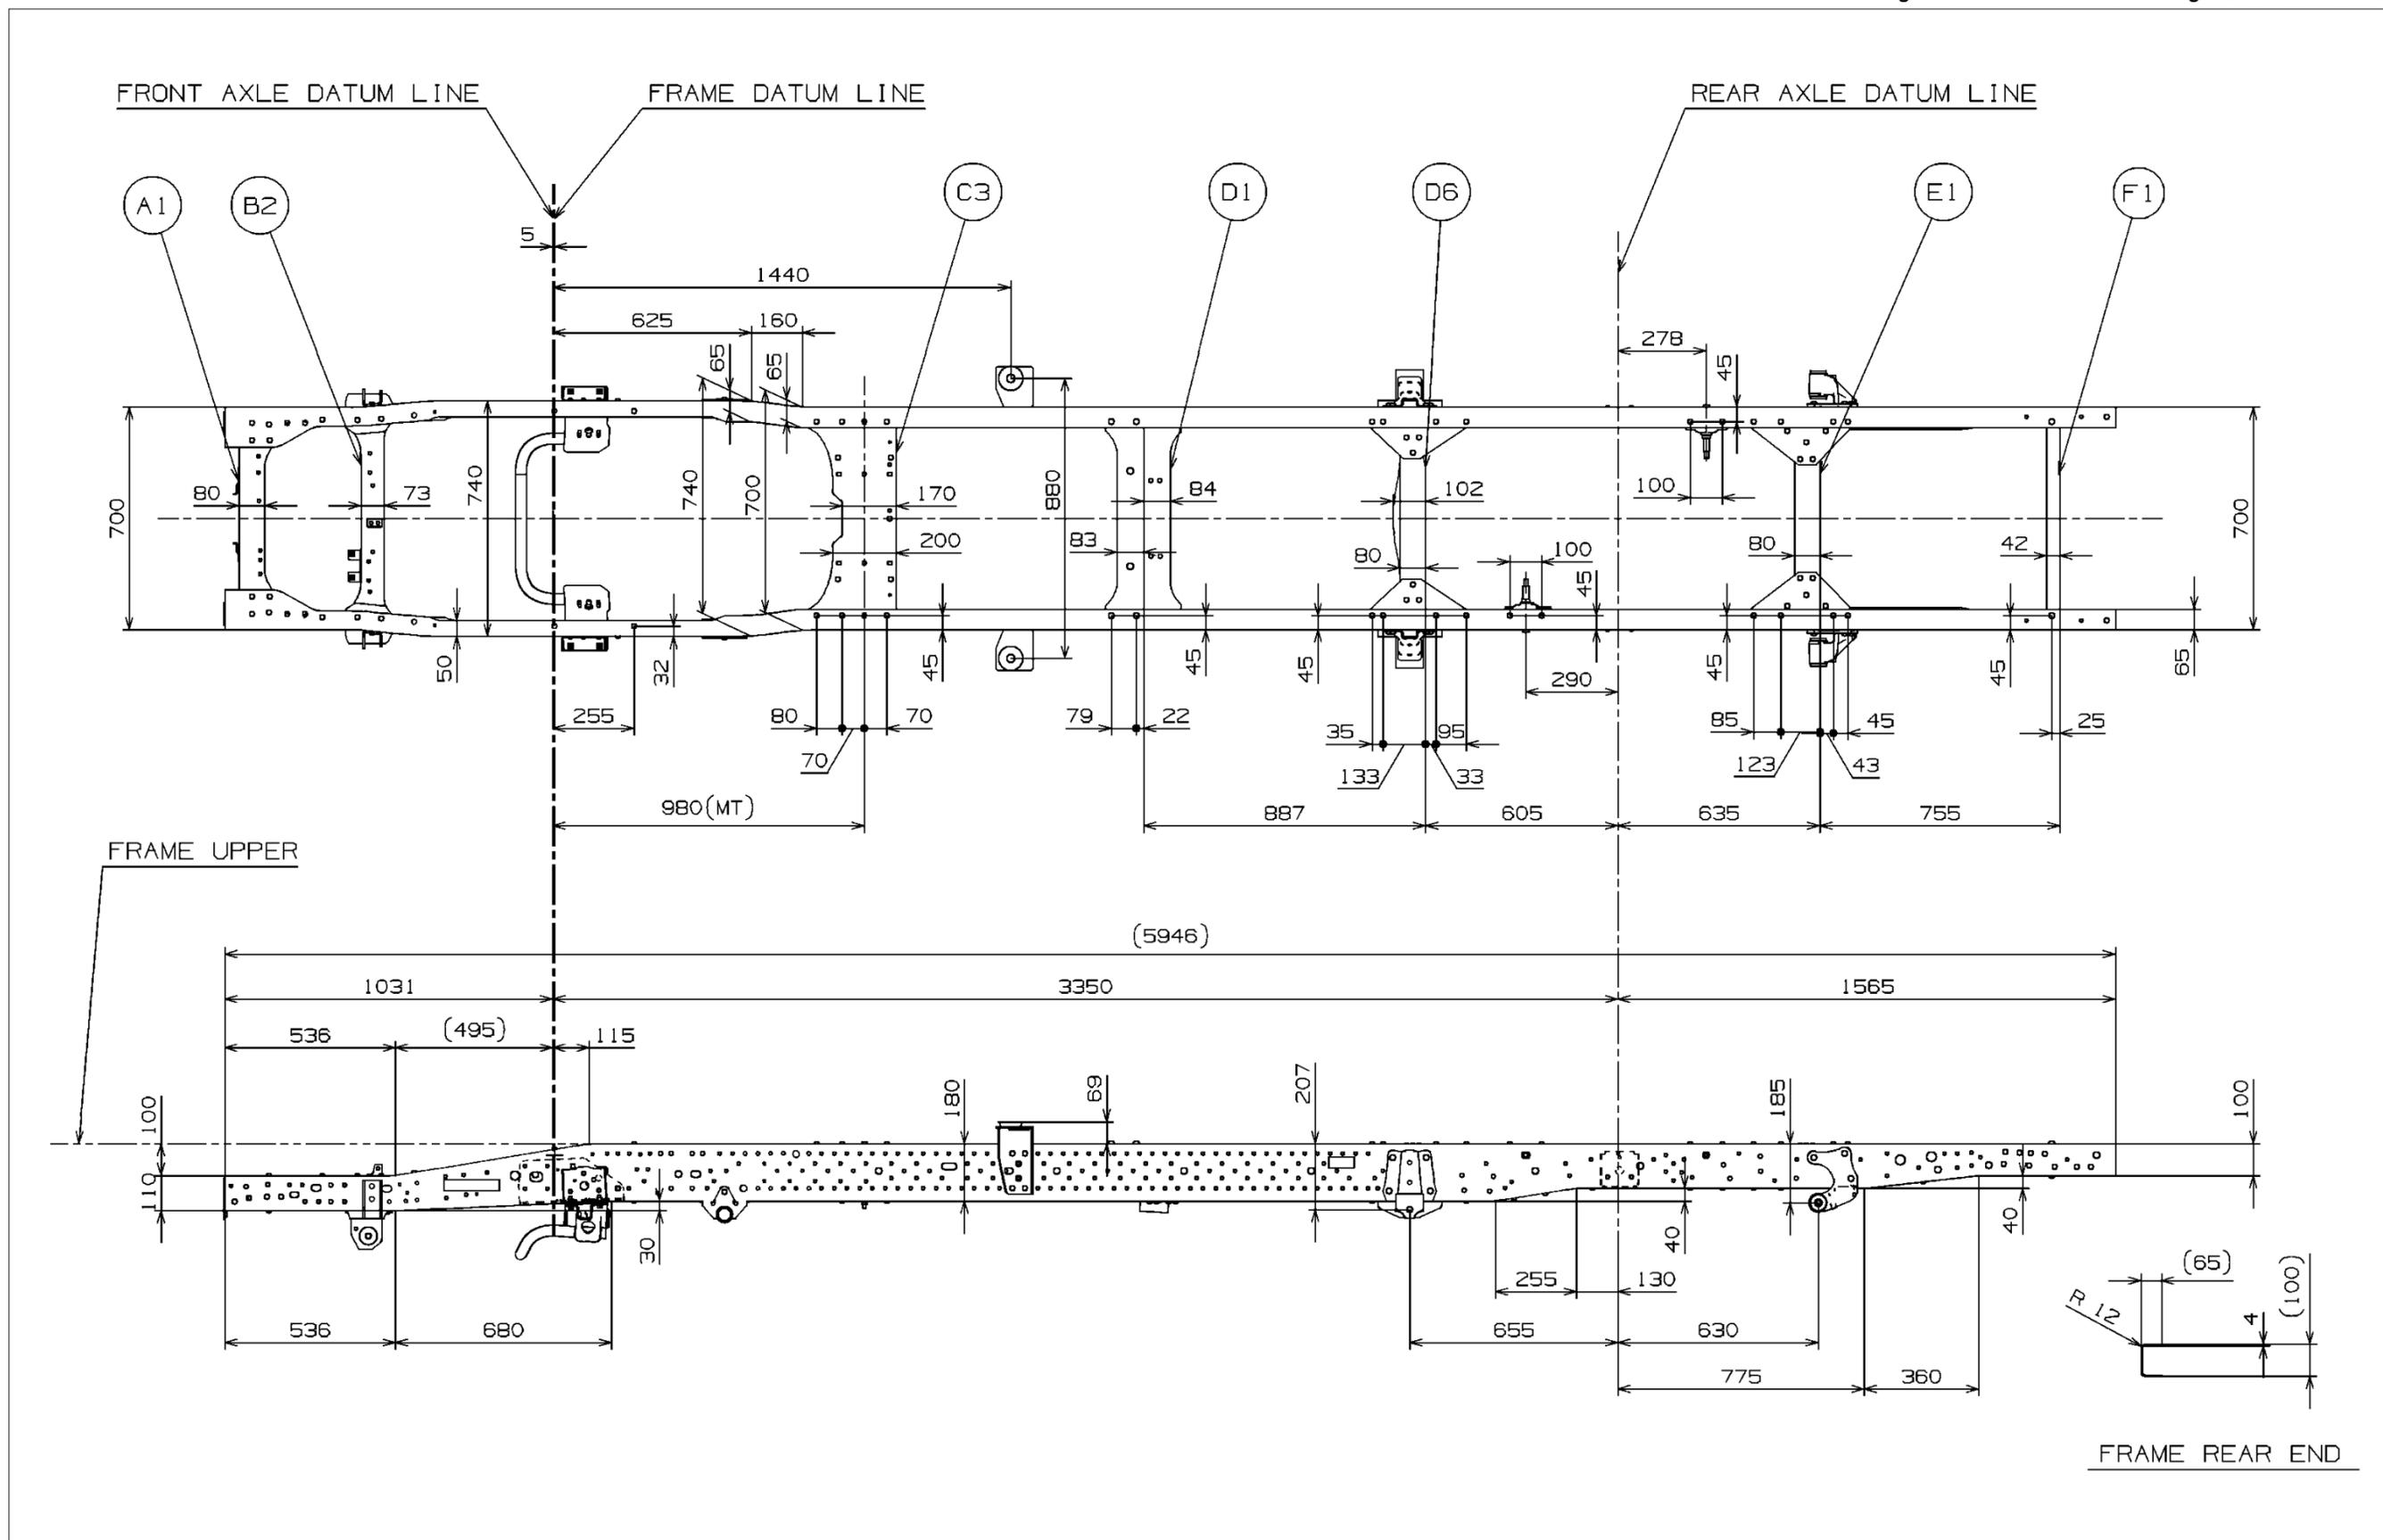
Chassis Frame Drawing NMR85L/U-EH5AYEN
